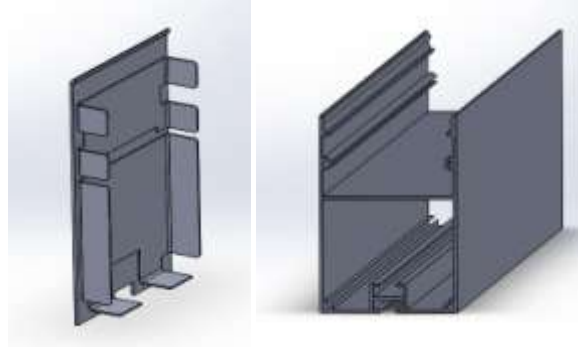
LED Light Fixture Body (Screw Assembly)
